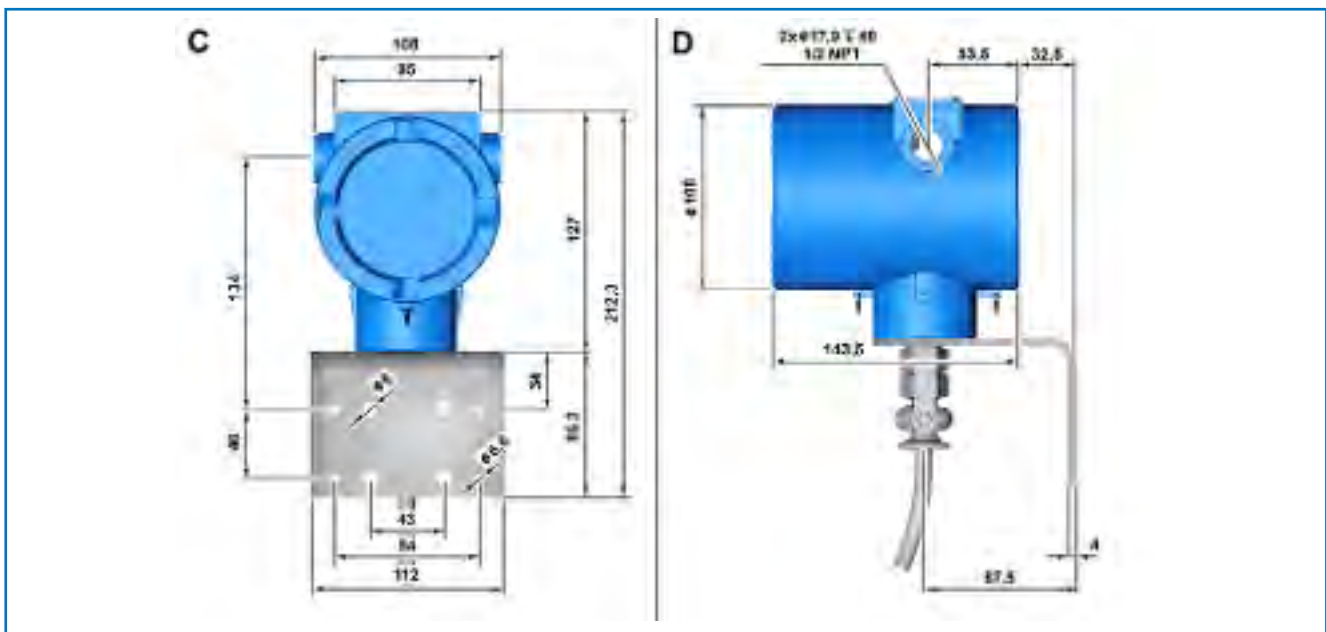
Dimensions of the RHE42 Coriolis transmitter (RHE42-R\*)
